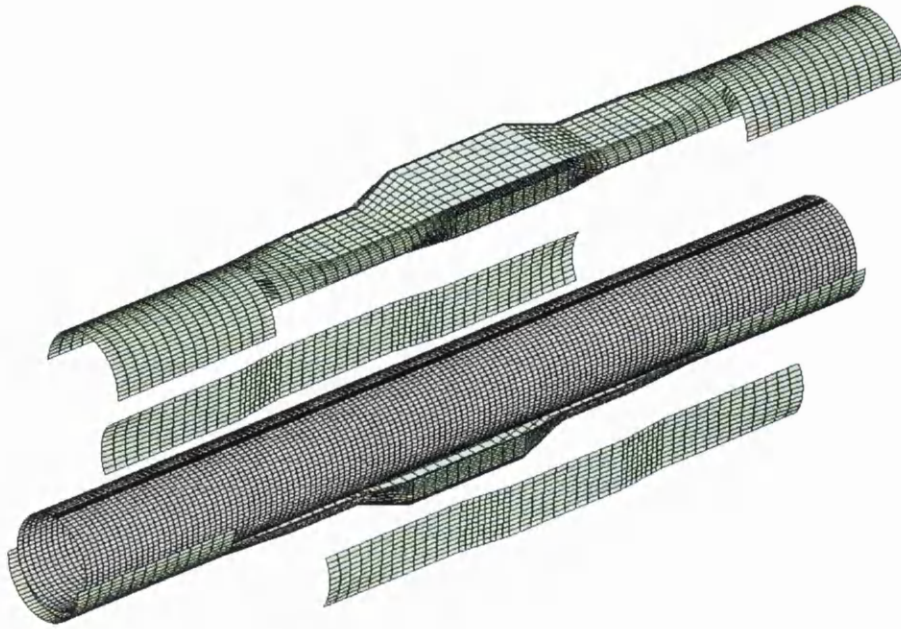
Tube* and hydroforming tooling meshes used in FE models (*weld integrated)
